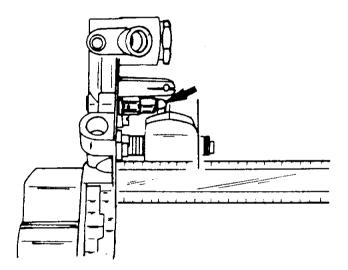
22 Float level measurement; adjusting tag arrowed (Weber)
